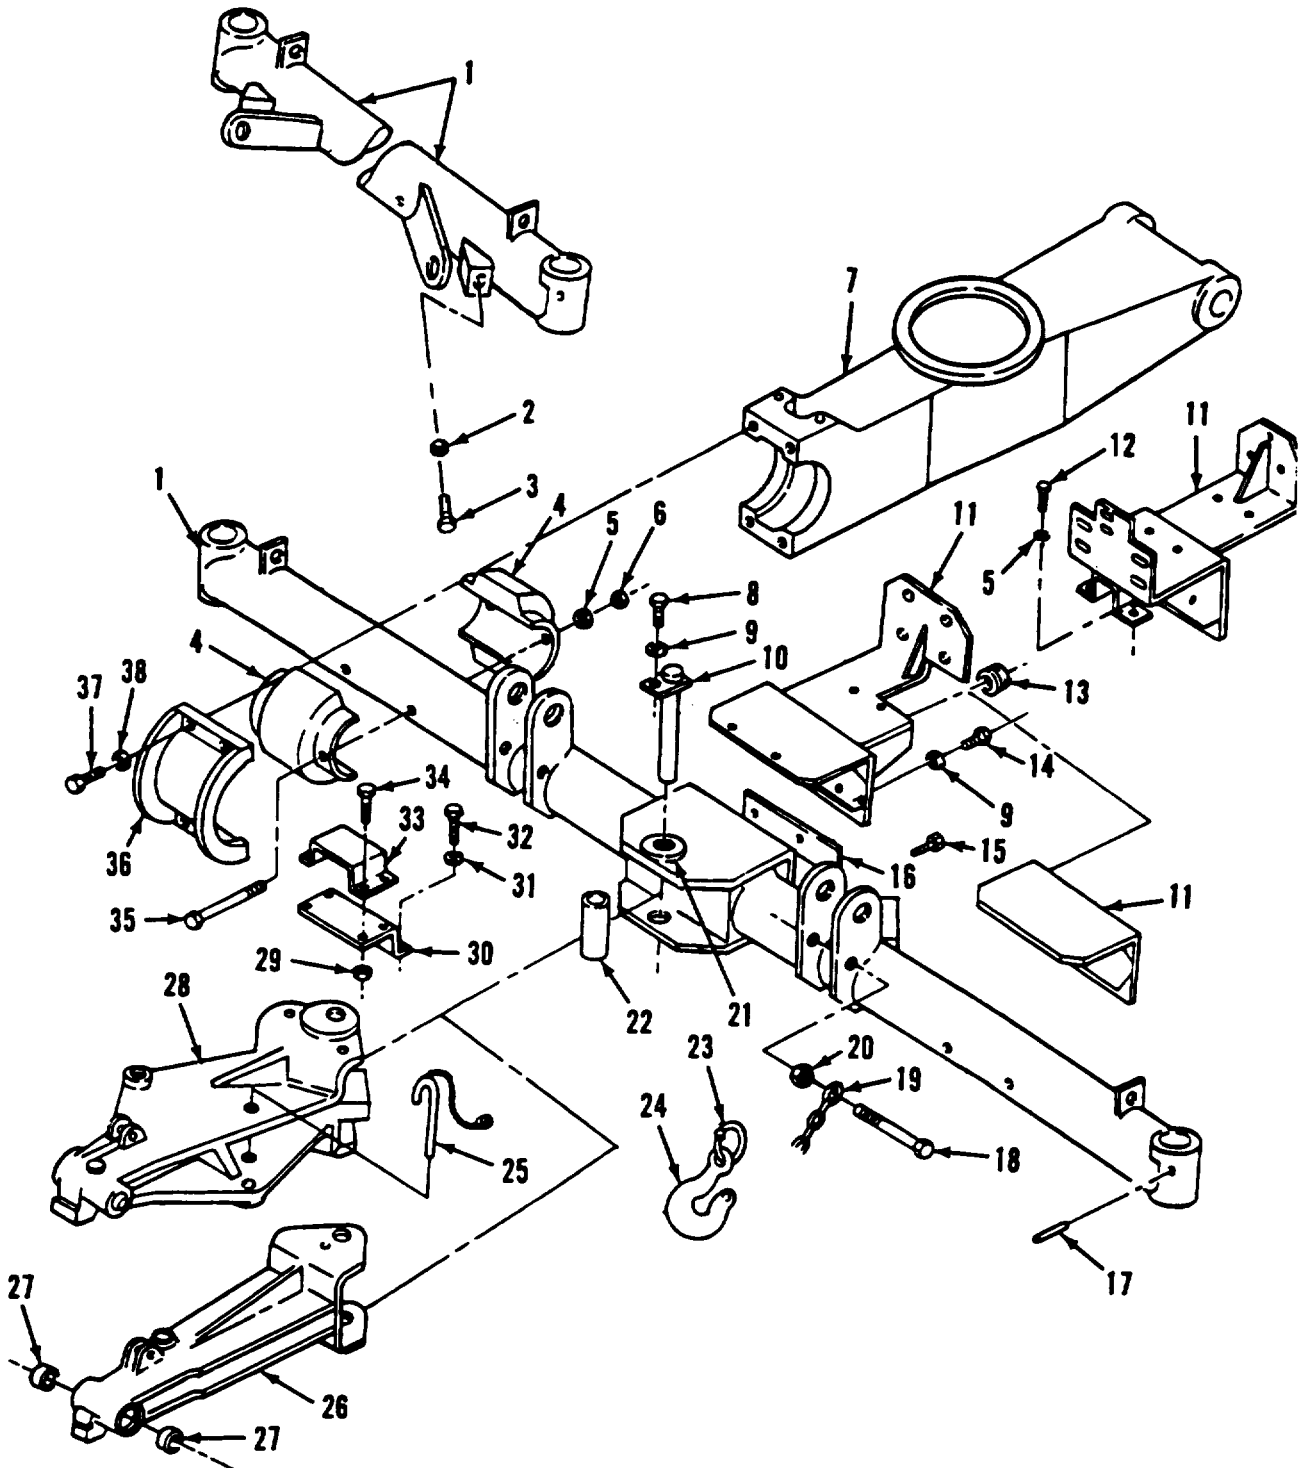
FRONT AXLE ASSEMBLY (M832).
